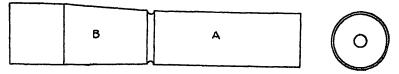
TYPICAL ARBOR FOR LOCATING LONG BUSHINGS
